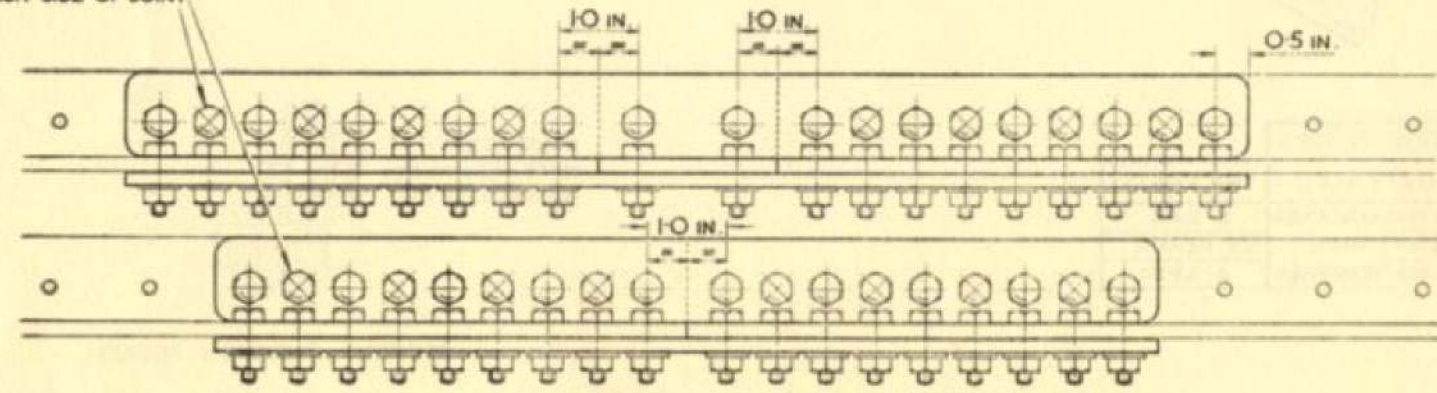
A. Skin repairs to fireproofing and jet pipe tunnels
